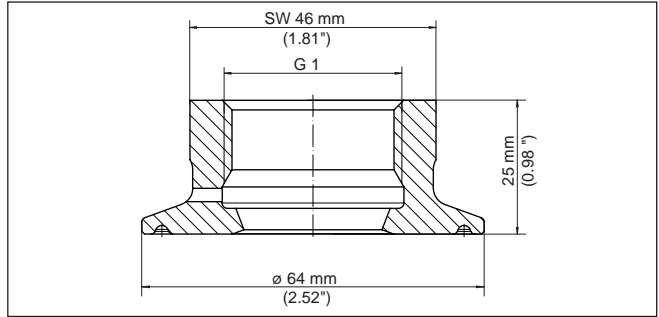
Dimensions hygienic adapter G1 (DIN 3852-X) on Clamp 2" (DIN 32676, ISO 2852) PN 40 - Cone seal
